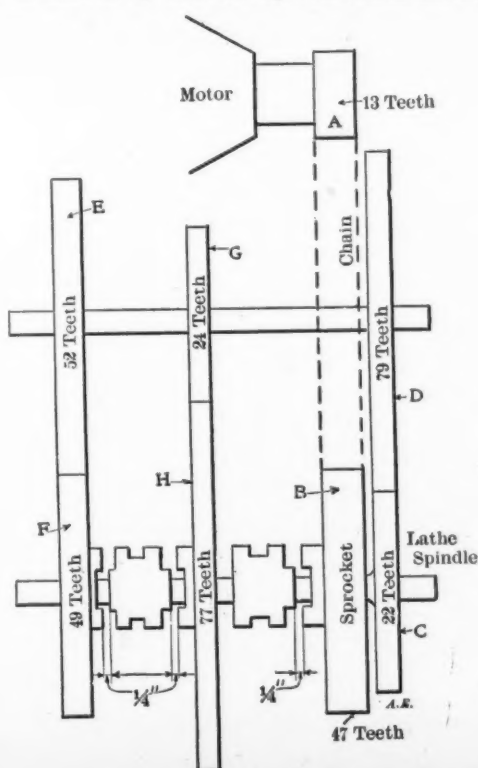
ARRANGEMENT OF GEARING FOUND NECESSARY ON A 25-IN. PUTNAM LATHE.
